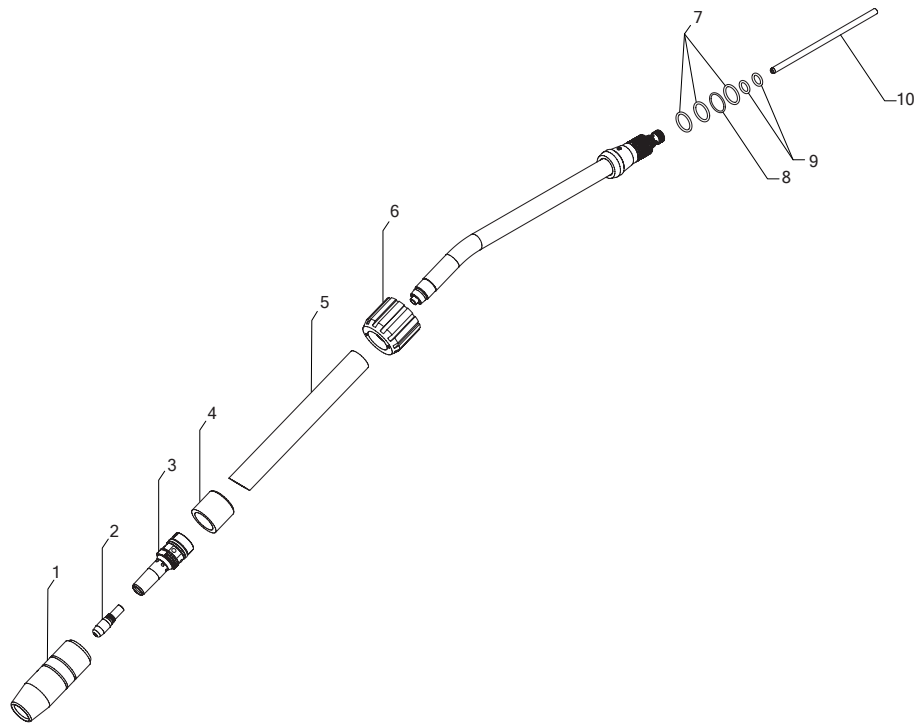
(Water) Head Tube Assembly Of XR-Aluma-Pro CB Gun
